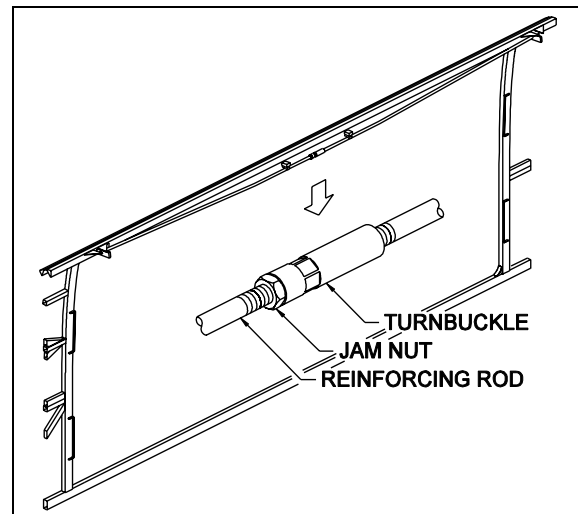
FRONT SLIDE-OUT ROOF REINFORCING ROD
